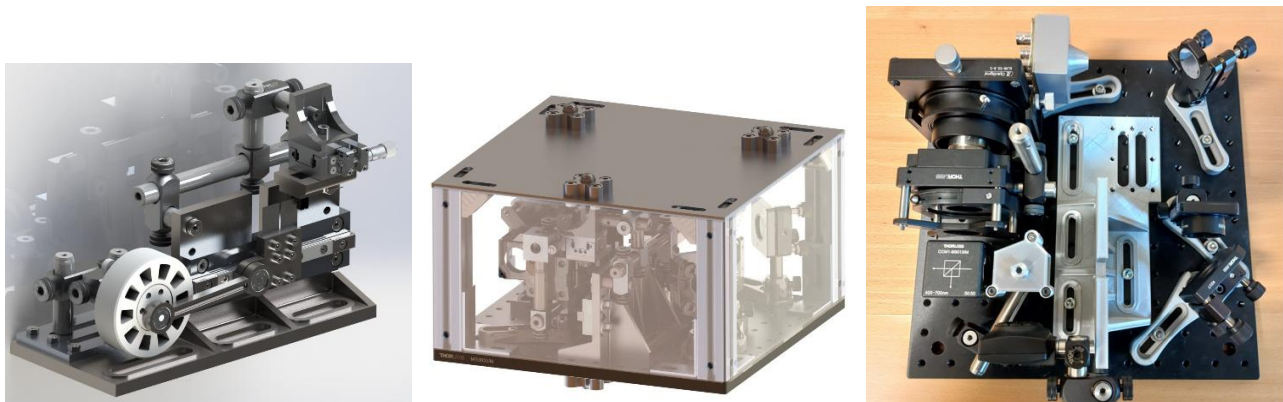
InPlanT engineered prototype (a) Crank and connecting rod drive. (b) CAD design. (c) Physical realisation.
